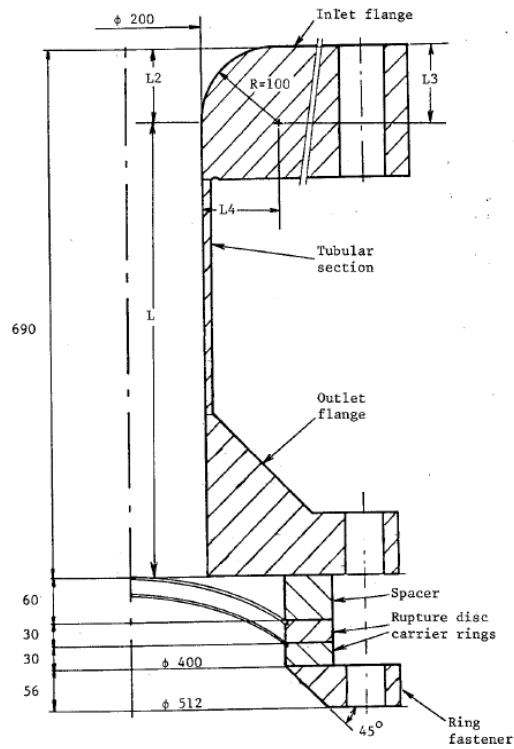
Dimensions of the test nozzle used for tests 13-14 [12]
